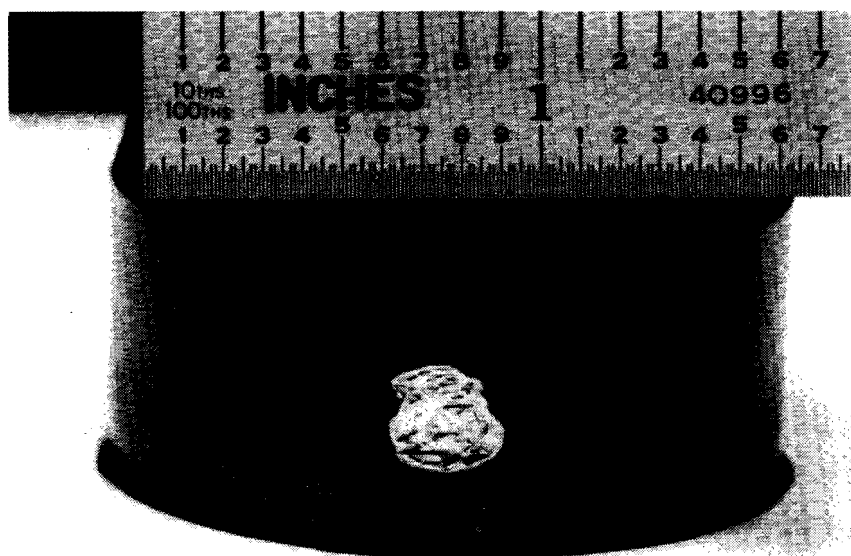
42-Degree Gearbox -500-7 Pinion Input Pinion Roller Bearing
